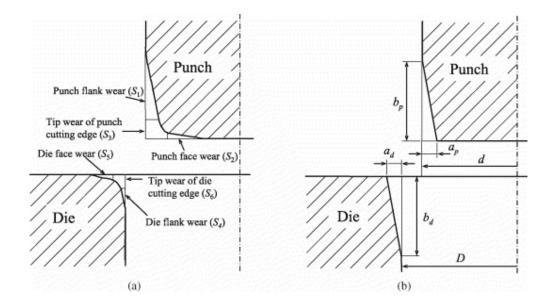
Geometry of the cutting tool worn surface: (a) generic case of tool wear and (b) tool wear analyzed
